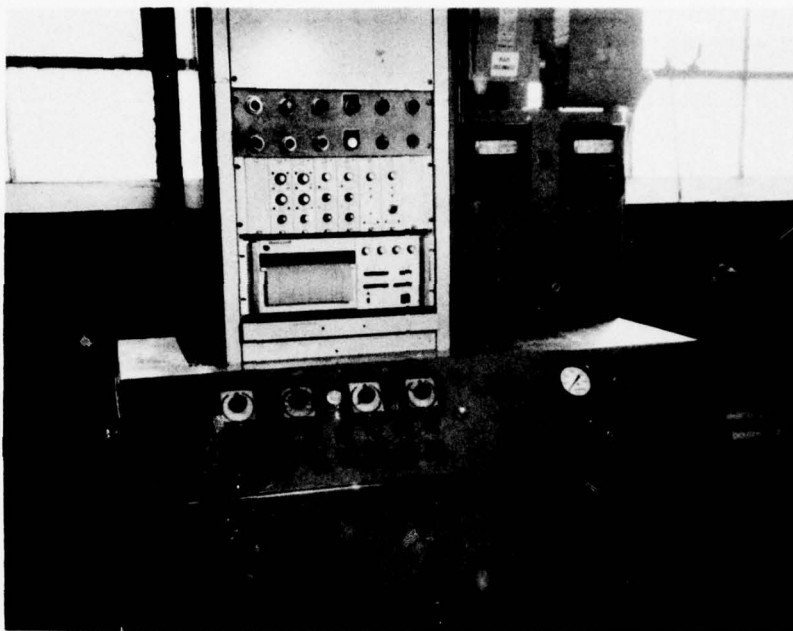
Instrumentation Monitor Console for Measuring and Recording Machine Casting Unit Process Parameters
